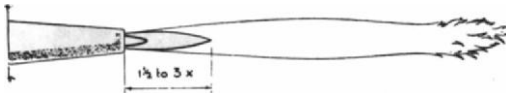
(c) Carburising flame (excess acetylene). A carburising flame is used for hardfacing.
